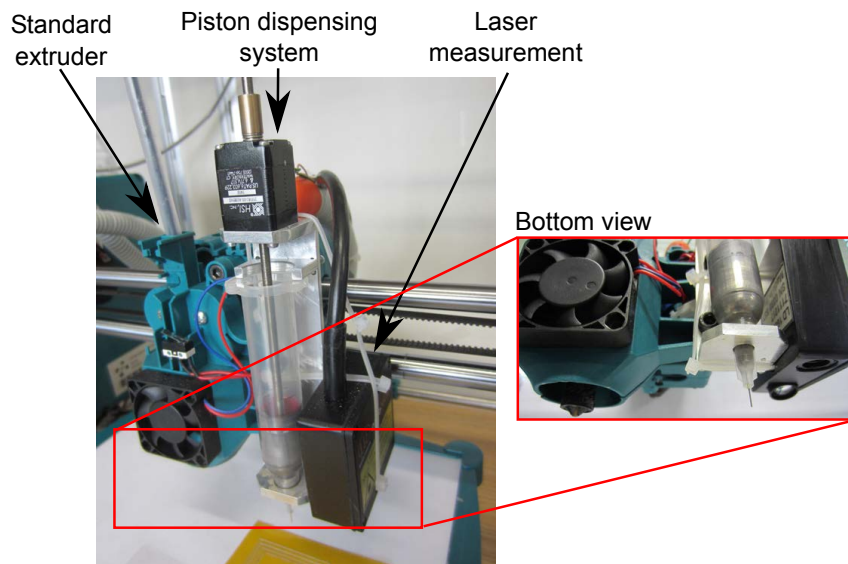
Modifications of FabbsterG 3D printer to manufacture thin-film magnetic sensors. The standard extruder is adapted with the piston dispensing system and a laser measurement system.
